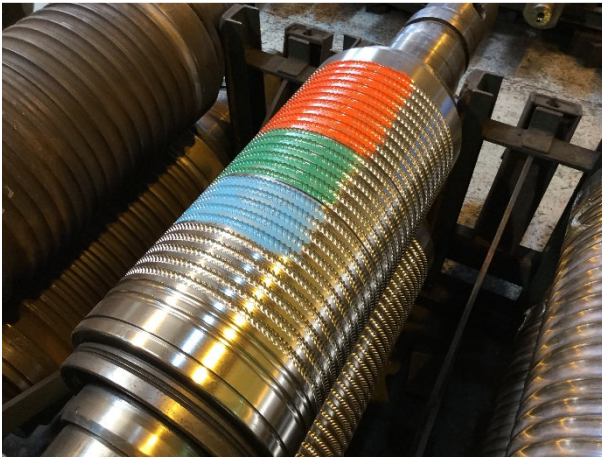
Rolling turning lathe. Grooves are designed to reproduce the desired rebar geometry.
